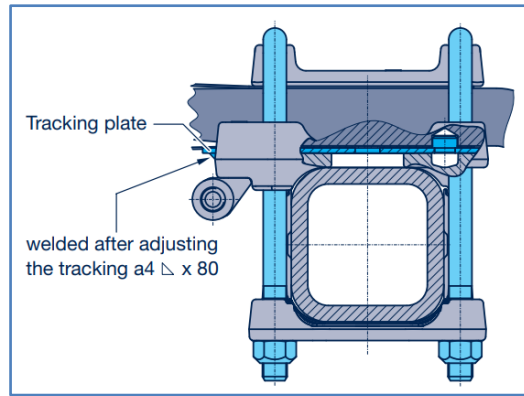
Illustration of the position of the tracking plate on the axle assembly
